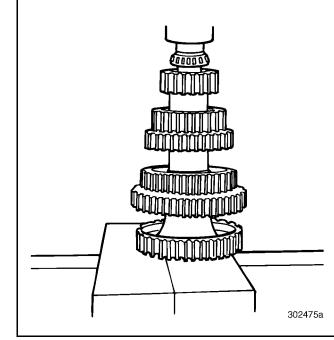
Pressing Rear Bearing Cone onto Shaft
